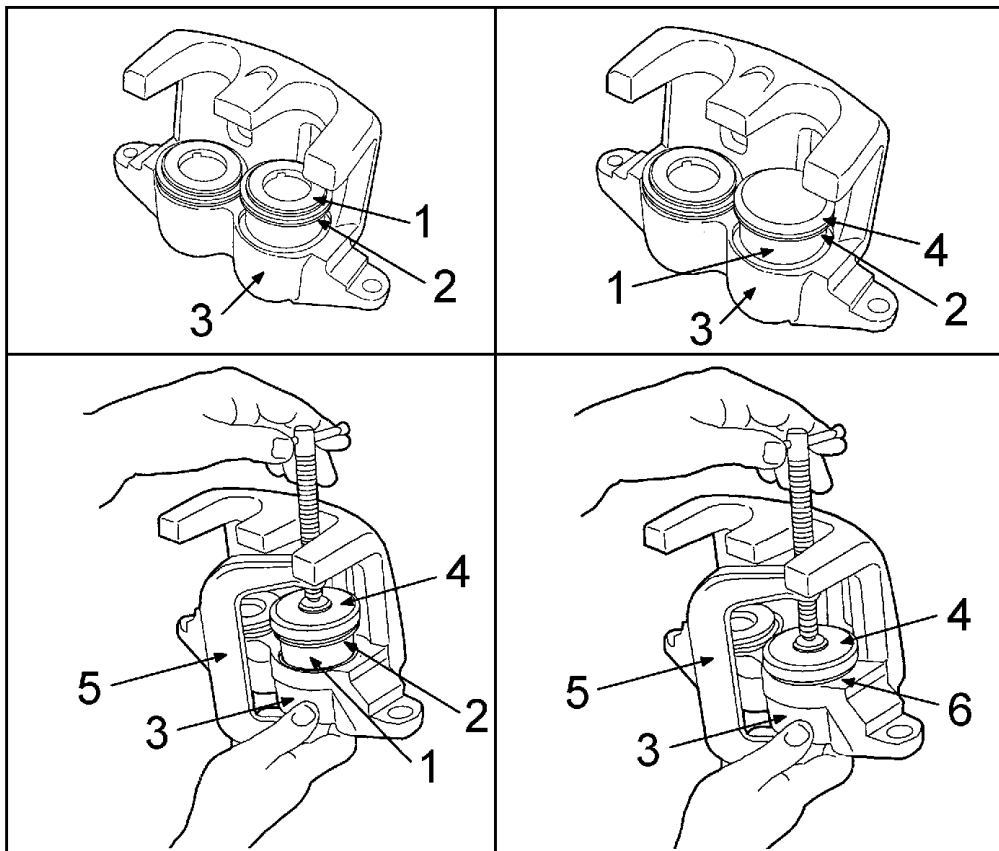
Install Caliper Pistons and Boots into Caliper Piston Bores
